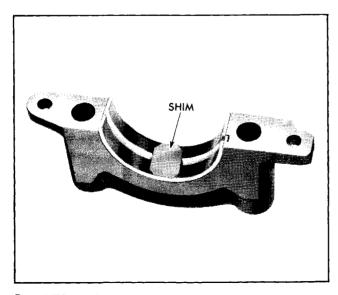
002" Shim Positioned in Cap for Checking Bearing Clearance
